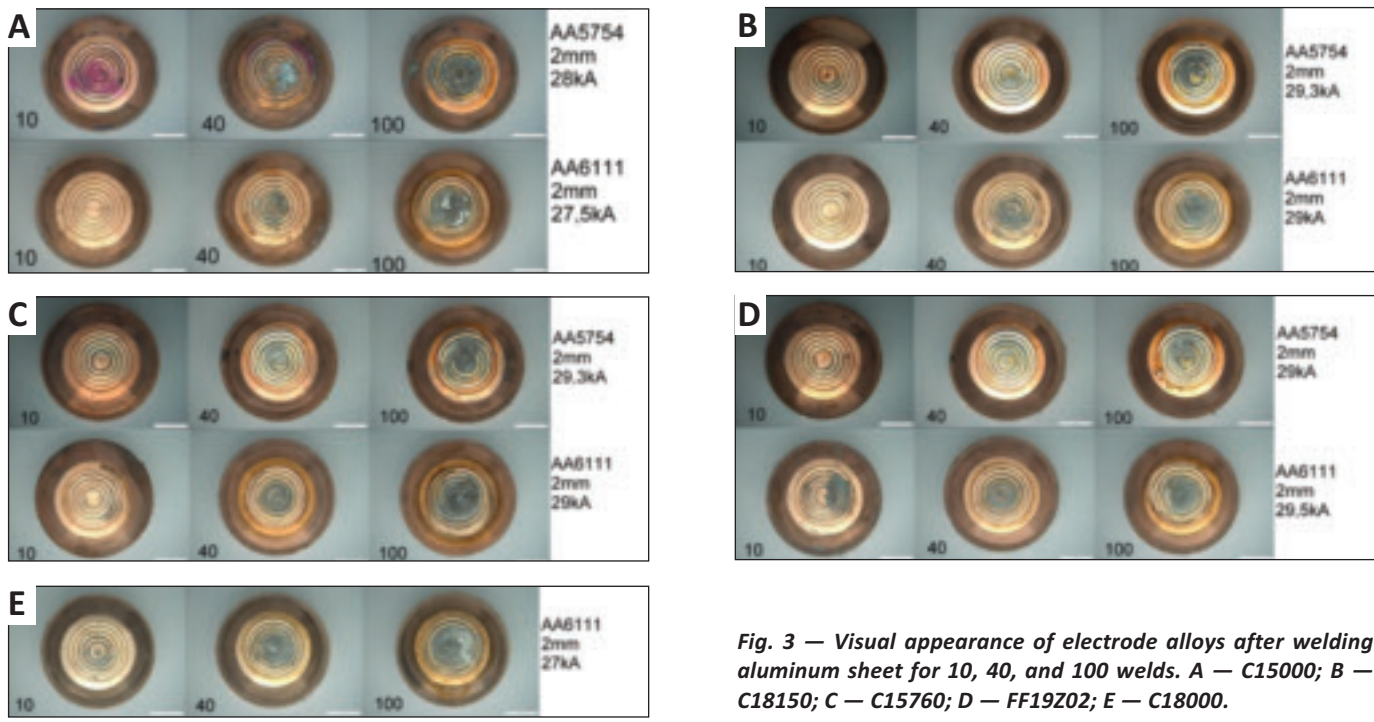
Visual appearance of electrode alloys after welding aluminum sheet for 10, 40, and 100 welds. A — C15000; B — C18150; C — C15760; D — FF19202; E — C18000.
